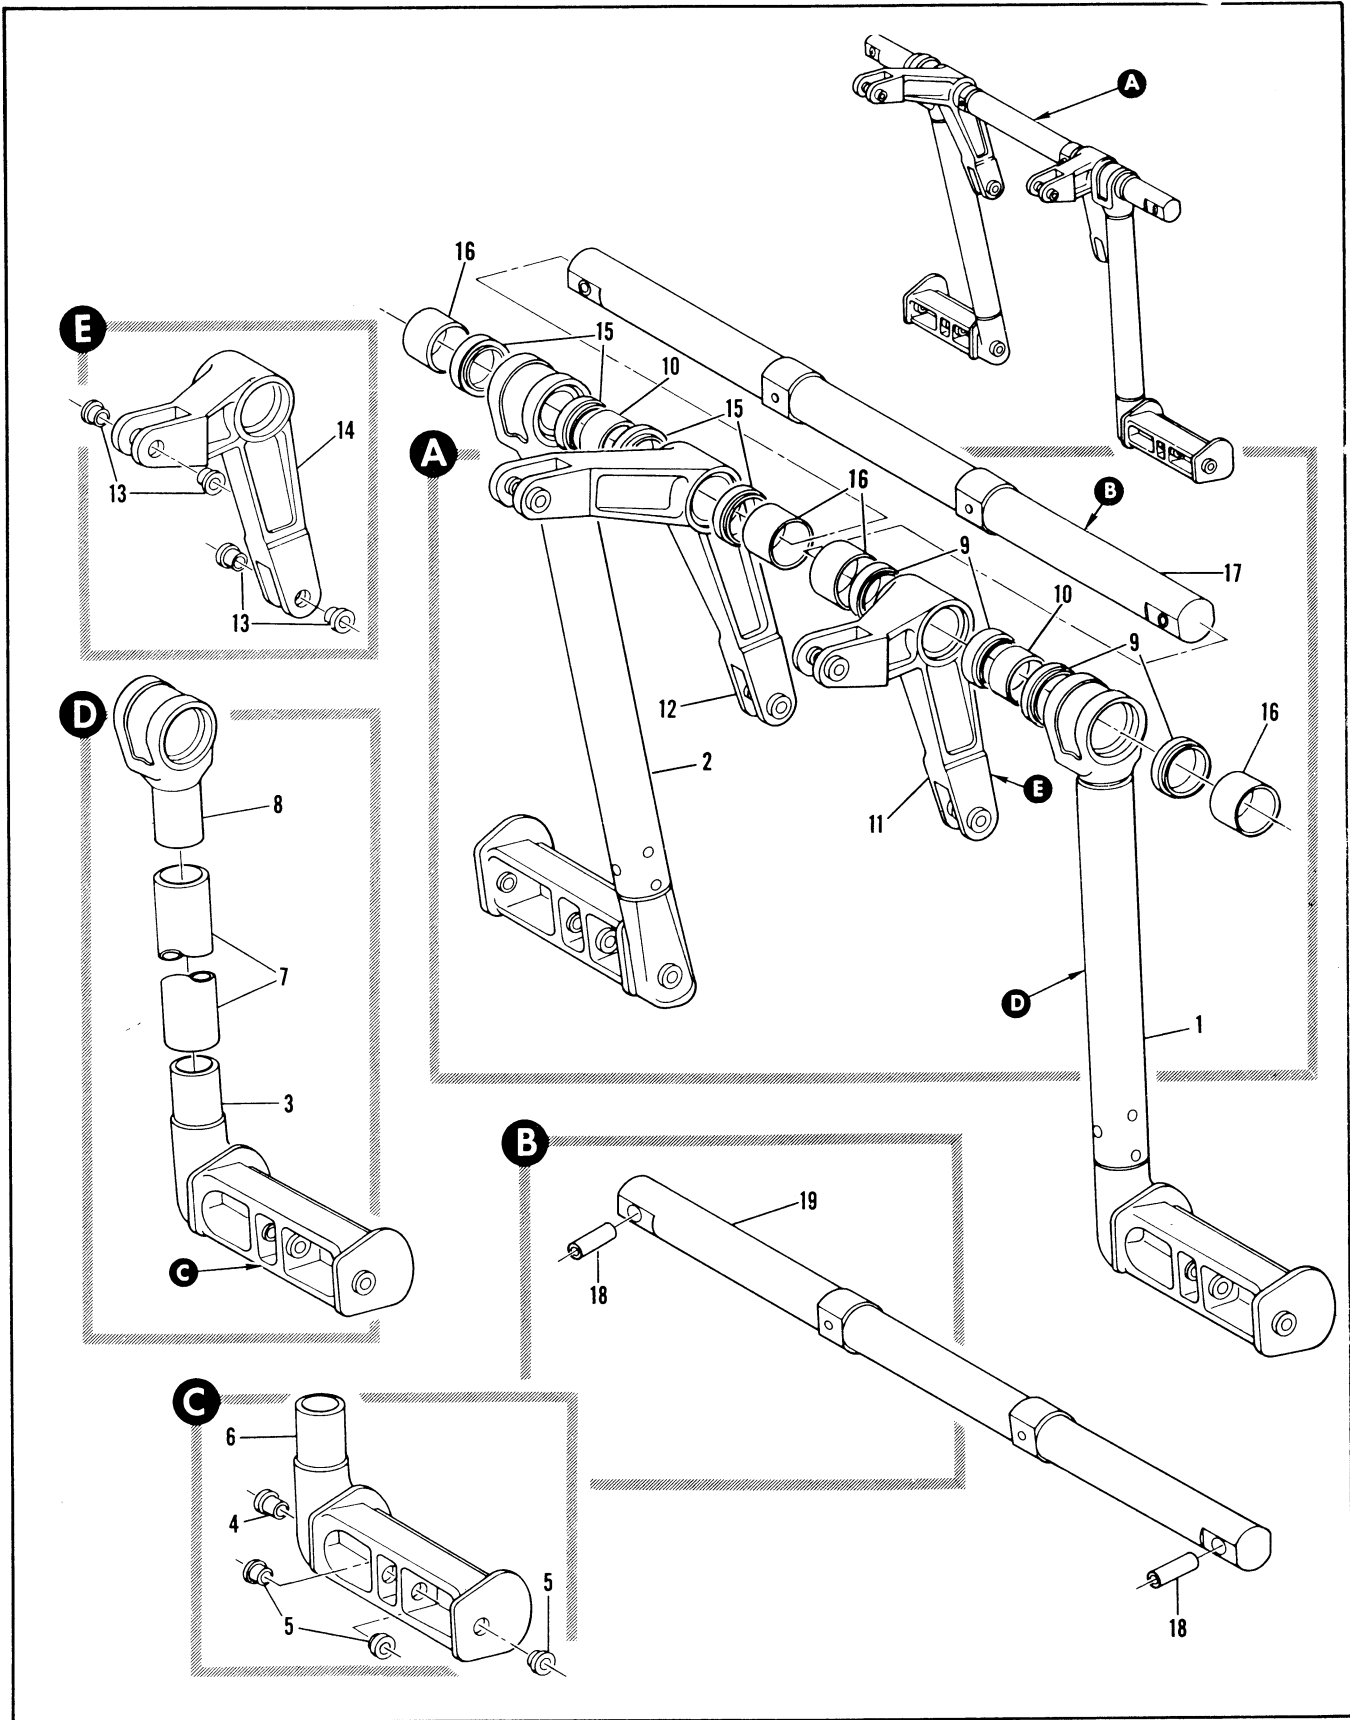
Rudder and Brake Pedal Hanger Tube Assembly
